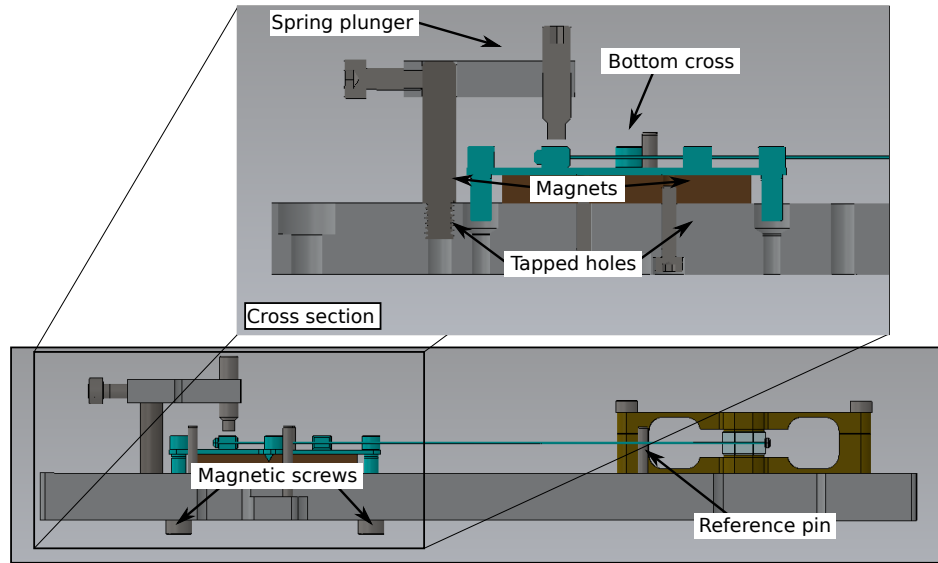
Computer-aided-design model of the weld jig and a cross section through the penultimate mass area. The bottom picture shows the weld jig with highlights reference pins for the 1 g mass caps and two magnetic screws. In the cross-section above the two tapped holes for these screws can be seen. They are placed to allow magnetic mounting of the penultimate mass by interacting with its vertical magnets.
